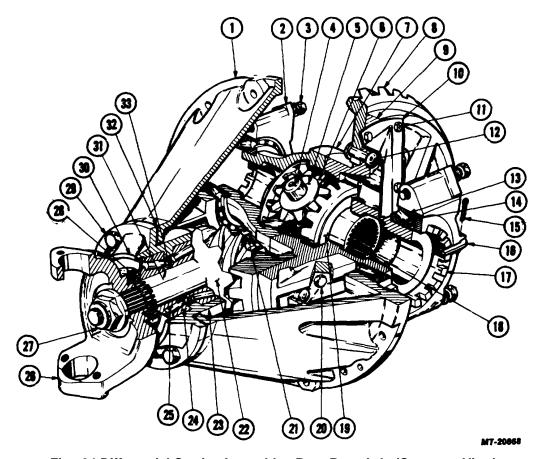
Differential Carrier Assembly - Rear Rear Axle (Cut-away View)
